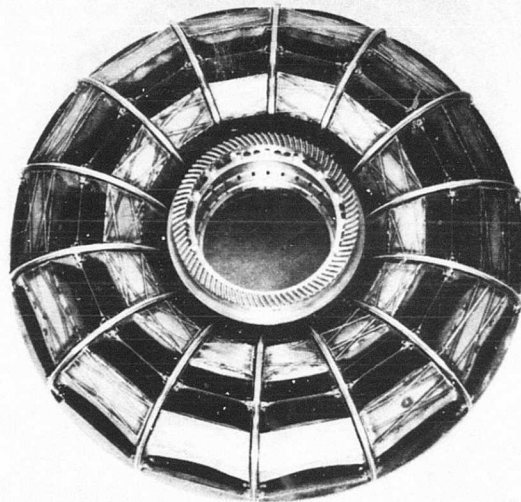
Front View of the Cold Side of the Rotor Assembly.
